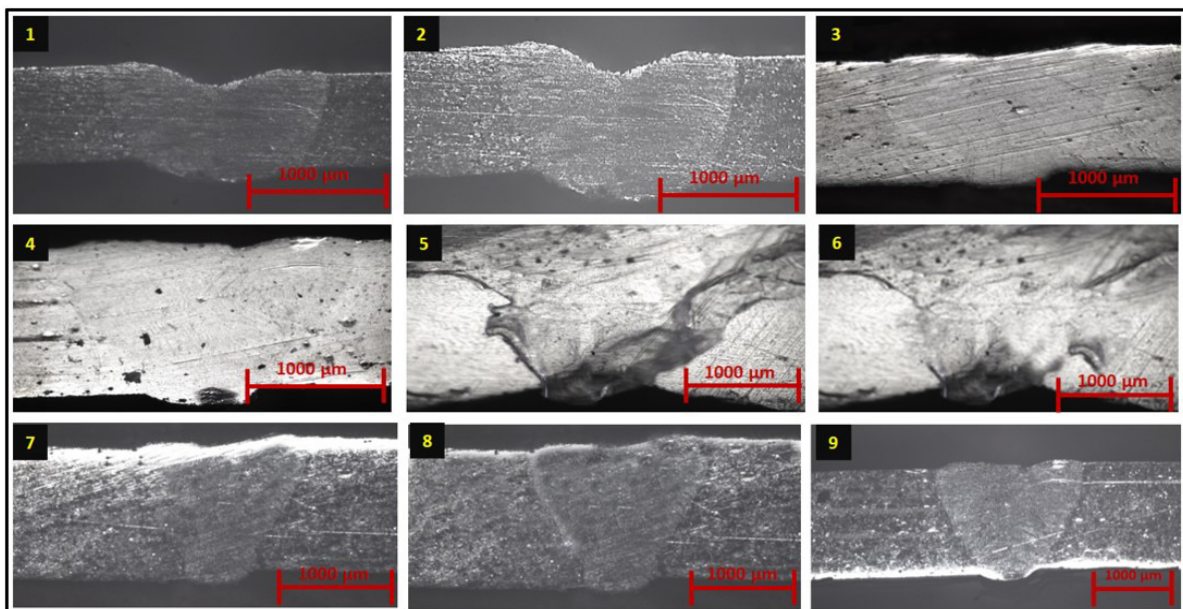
Weld bead geometry. Weld bead macrograph at parameters No 1 to 9
